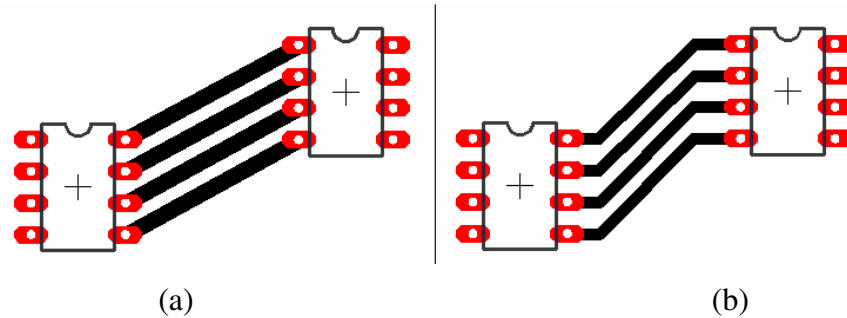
PCB routing examples: (a) bad routing; (b) correct routing.
